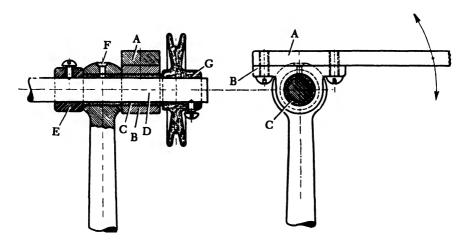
Detail of the rotating autoclave: (A) support frame; (B) connecting bearing; (C) bronze bushing; (D) axle; (E) positioning ring; (F) oil hole; (G) drive pulley.
